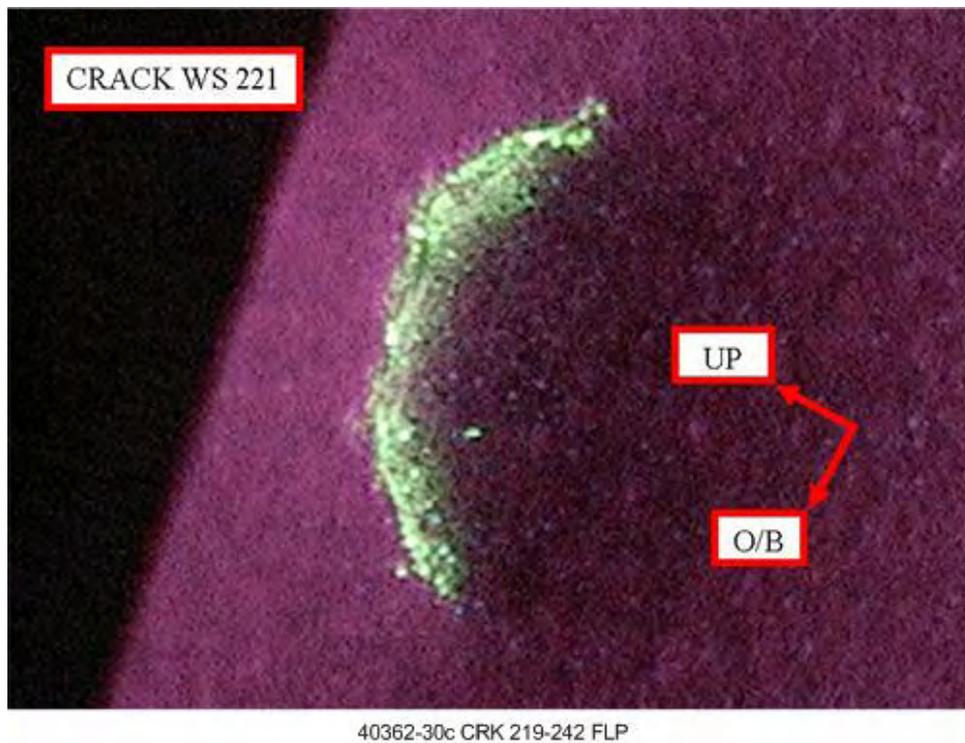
Fluorescent Liquid Penetrant Indication of Crack on the Left Wing Rear Spar WS 221
